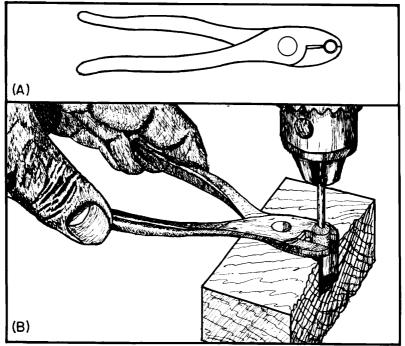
(A) A $4\frac{1}{2}$ -inch ignition pliers with 7/32-inch hole ground into the nose for forming a No. 2 band when placed on a bird's leg. A band is shown in the hole with the ends properly butted together. (B) Sketch showing manner of grinding the hole into the nose of the pliers on a drill press by the use of a small grinding wheel. A light pressure on the plier handles controls the rate of grinding.
